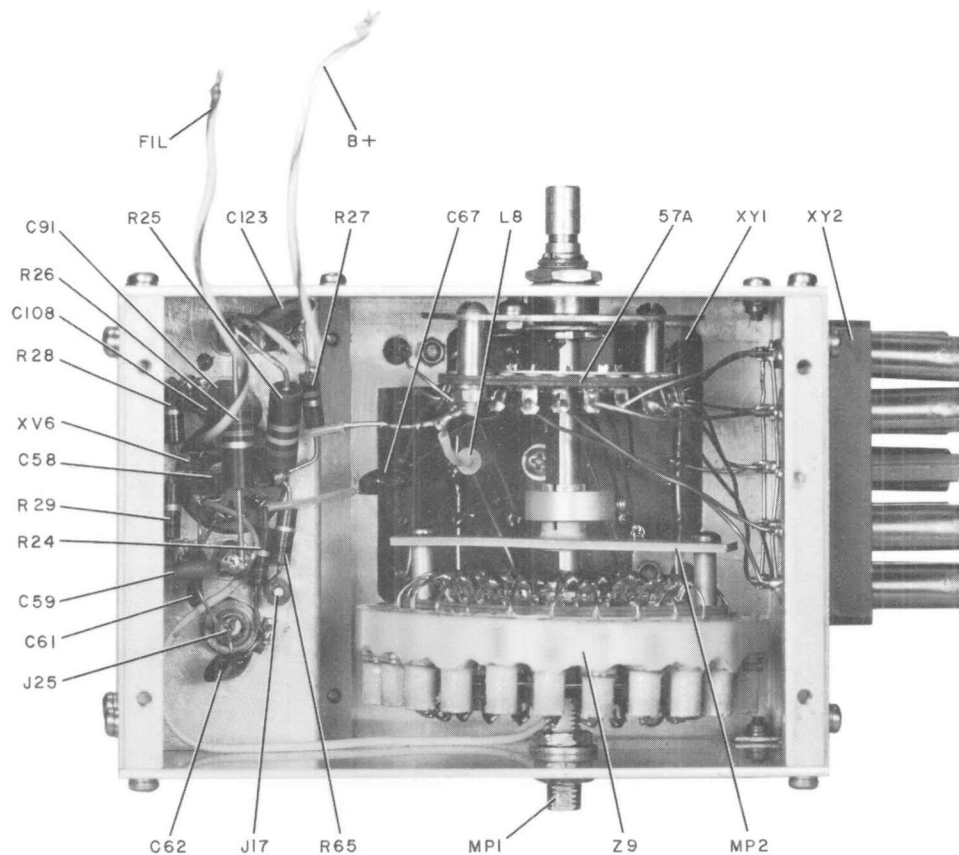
Master Oscillator Subunit, Bottom View, Parts Identification
